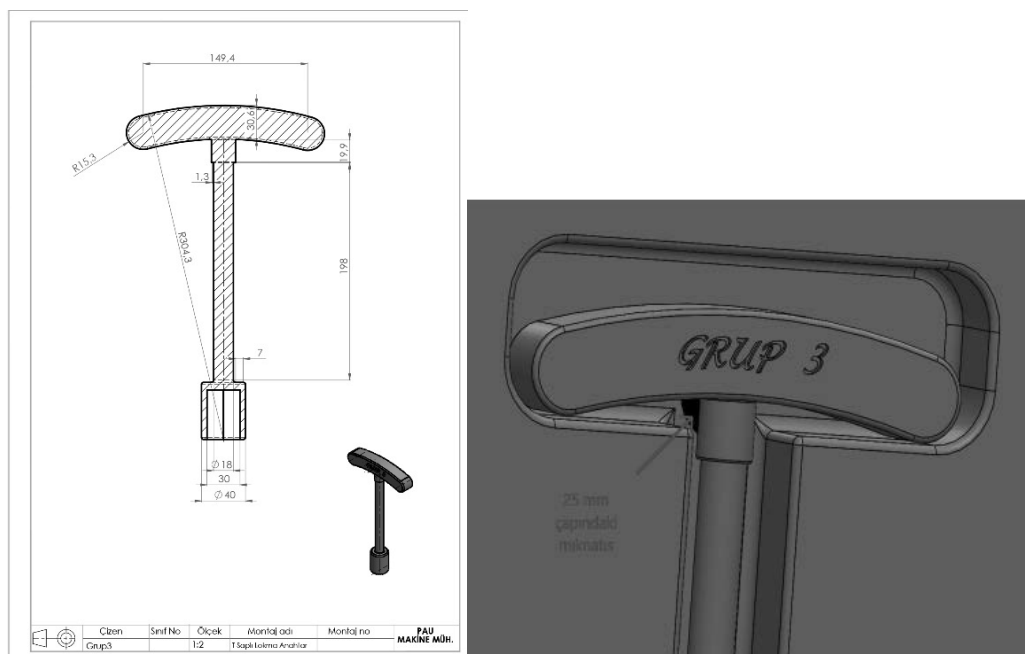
Technical drawing of the T-wrench and method of placing the T-wrench into the slot
